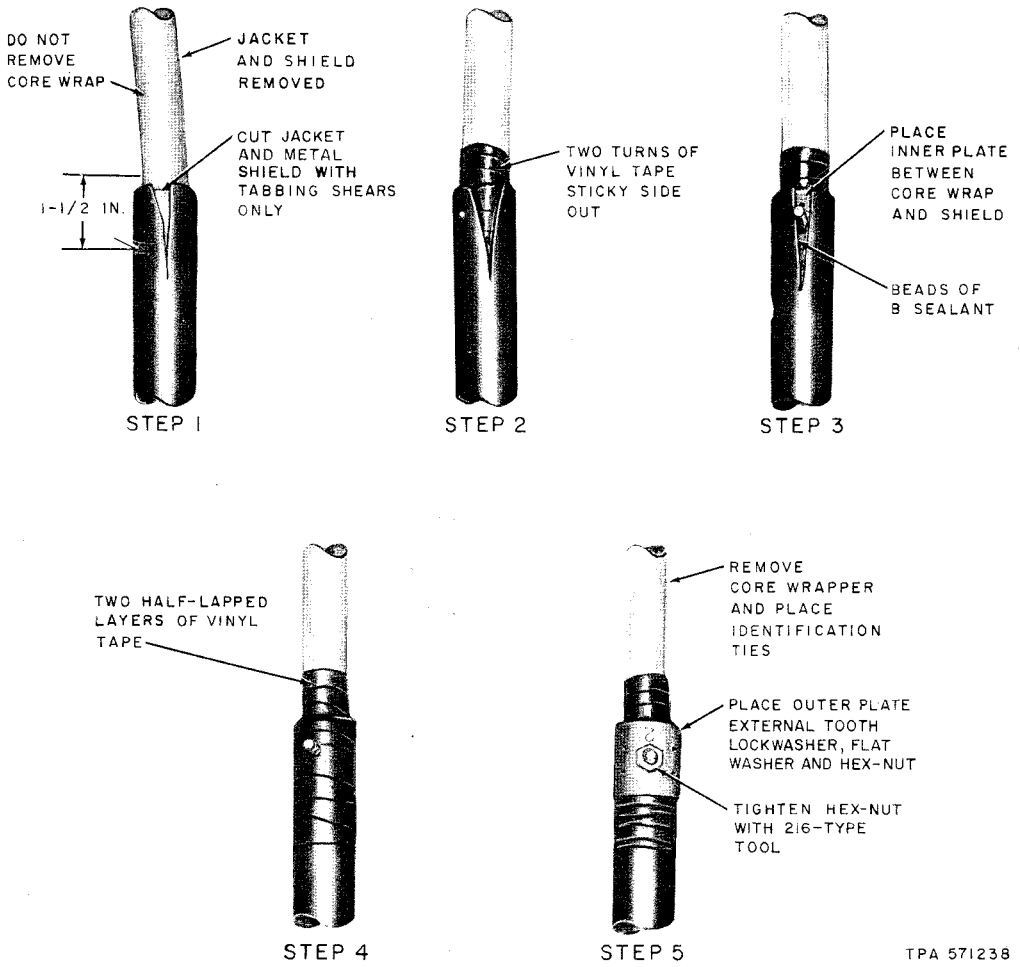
Installing B Bond Clamp—Multijacket Cable
